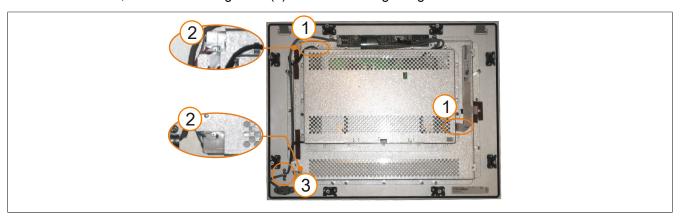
15" Automation Panels - Unscrewing and disconnecting
